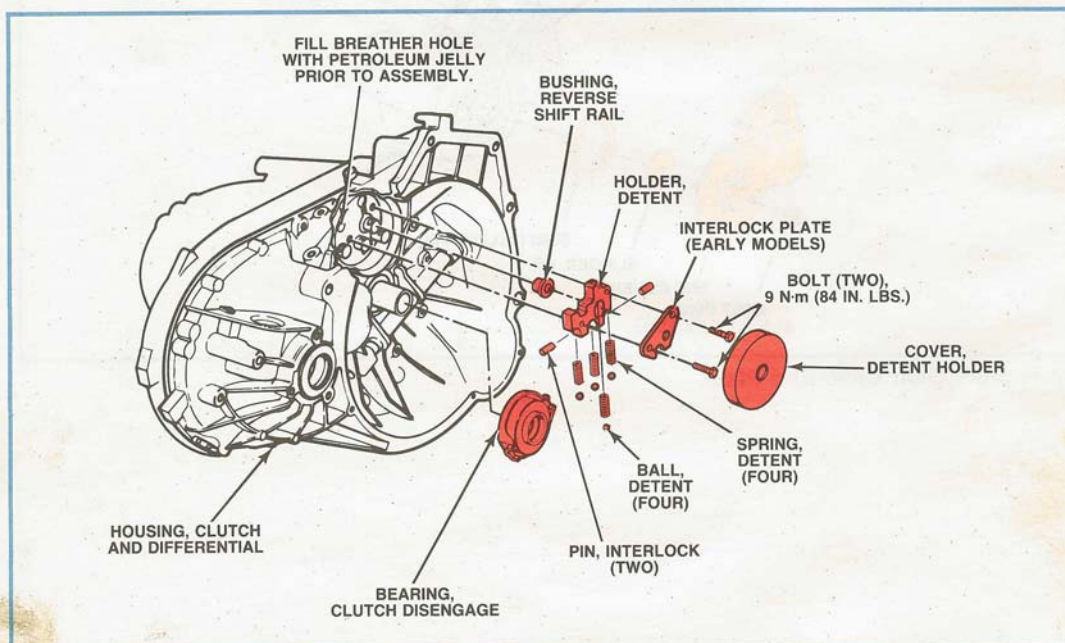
, Shift Rail Detent Components/Clutch and Differential Housing.
